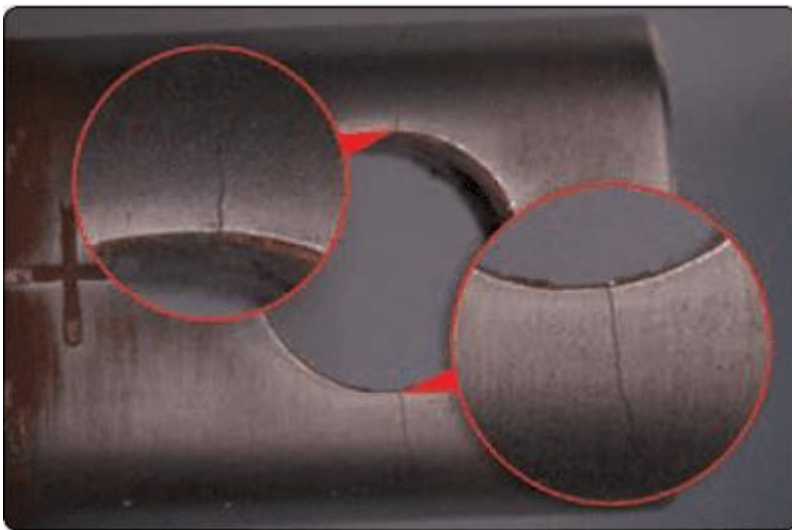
Fatigue crack on the bottom end fitting of a Hydrosorb shock absorber
